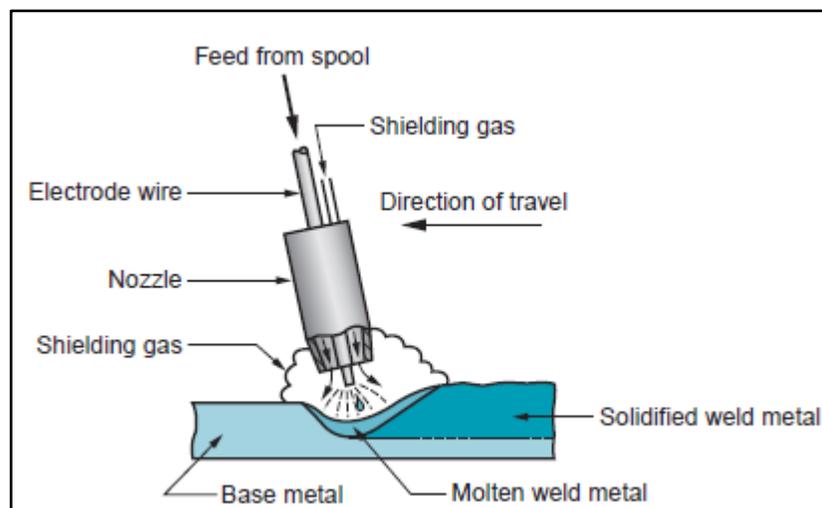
Schematic diagram of gas metal arc welding (GMAW) (Groover, 2010)
